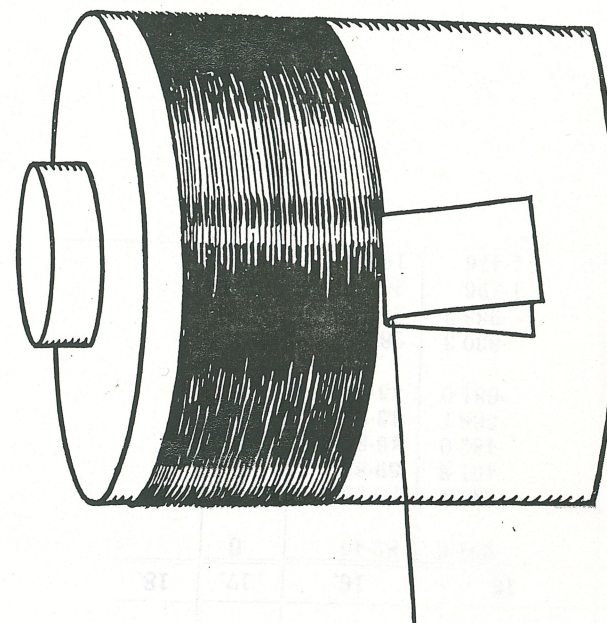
Sketch of paper tab folded in to cover joint in secondary wire.
